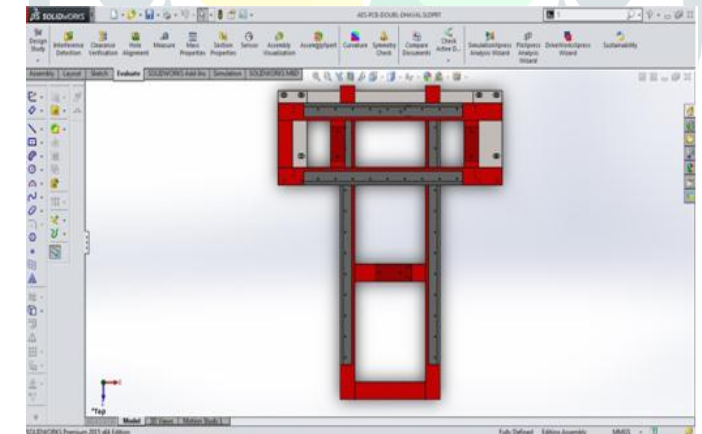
Top view of PCB Drill Mech SS 300 Structure
